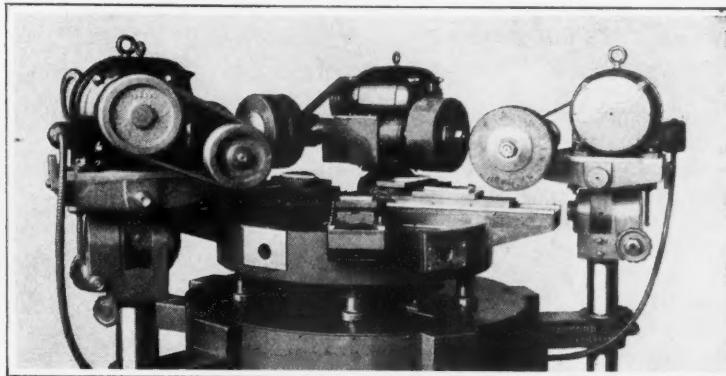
Table Design that Provides for Reciprocating the Work under the Polishing Wheels
